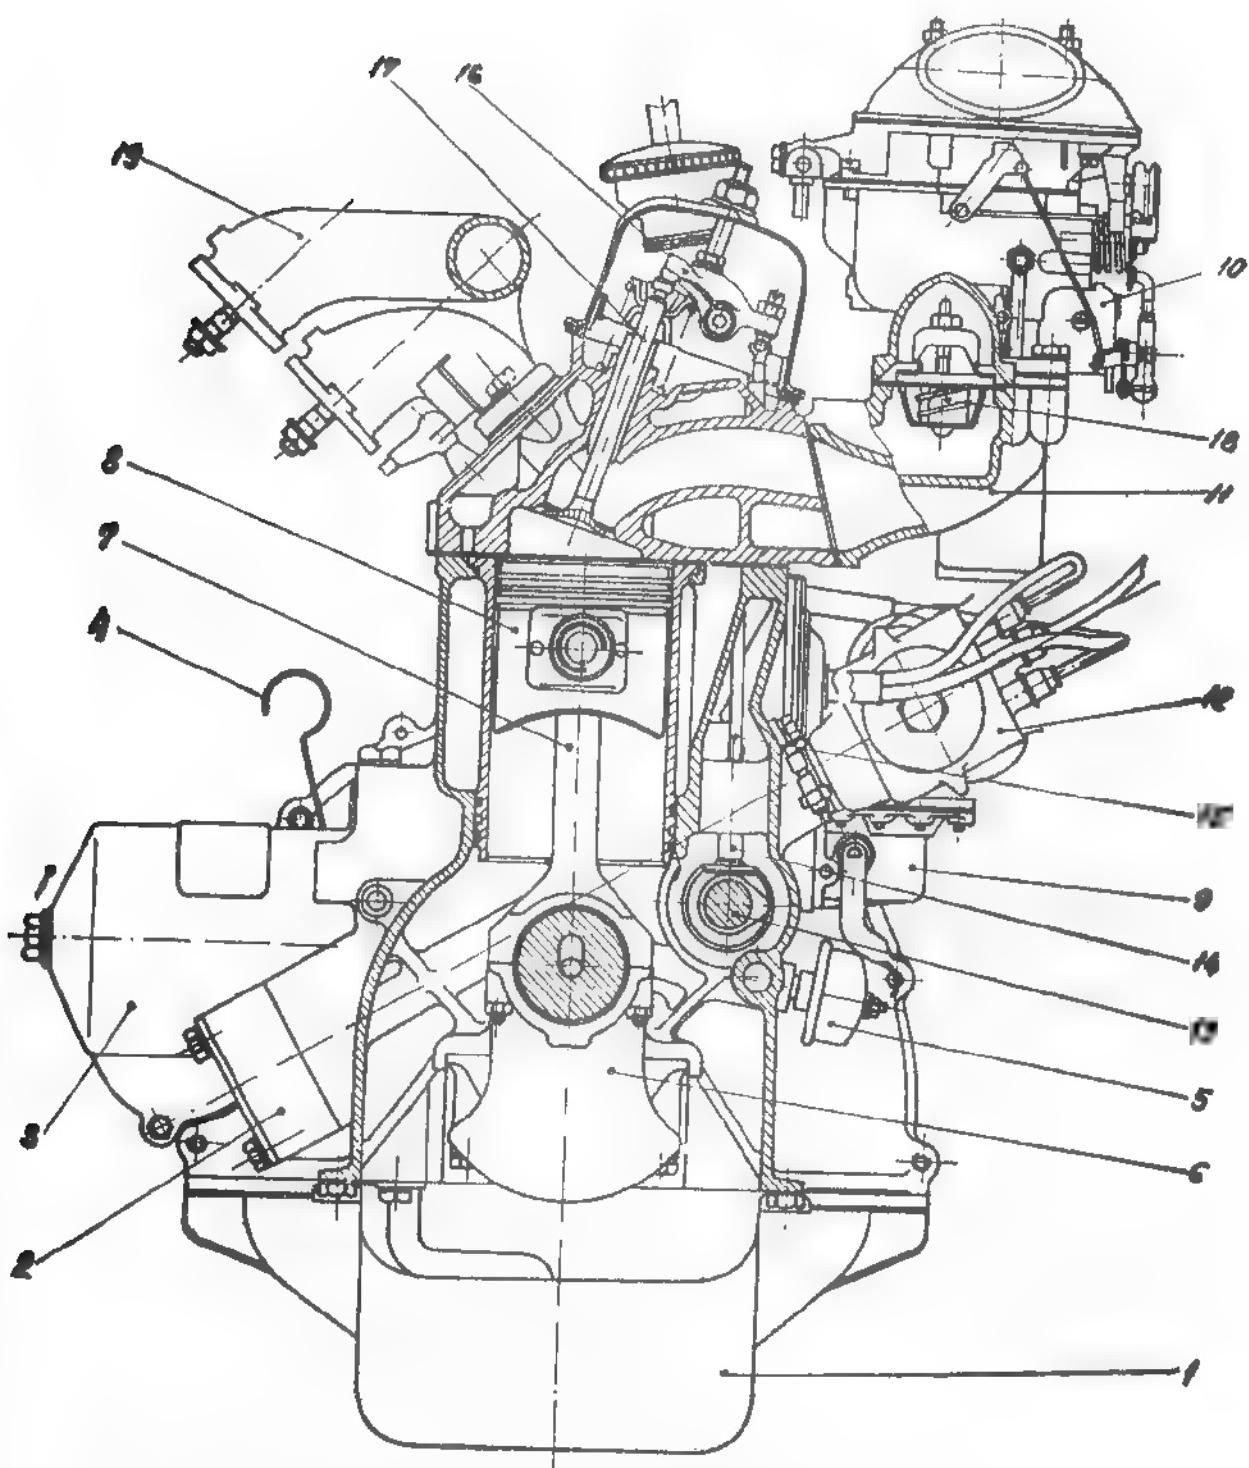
CROSS SECTION OF ARO L-25 ENGINE.
